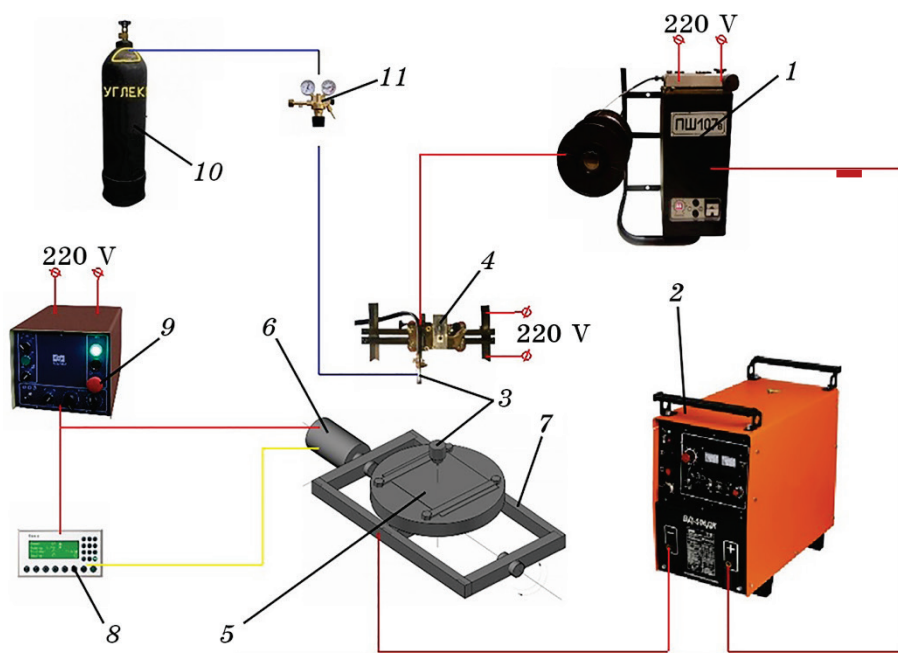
Structural scheme of the surfacing installation: 1—semi-automatic wire feeder; 2—power supply; 3—welding torch; 4—welding torch movable frame; 5—sample for surfacing; 6—stepper motor; 7—movable plate; 8—control console; 9—control block; 10—CO₂ gas balloon; 11—gas reducer. Red line—power main; blue line—gas main; yellow line—main for data input.
